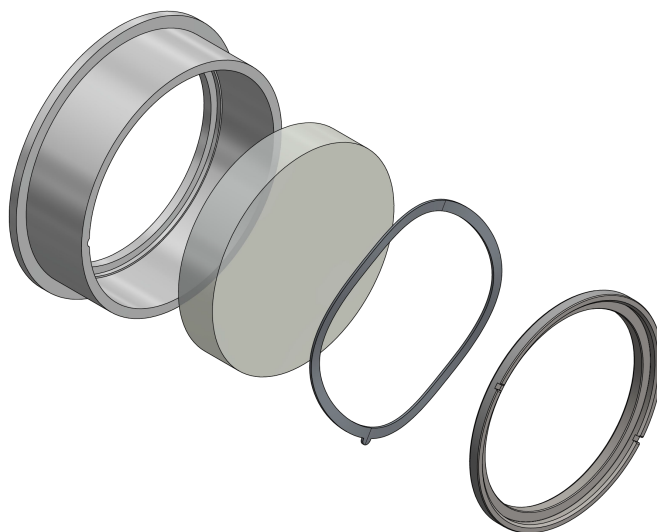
A schematic drawing of the components of the mirror holder assembly. It includes from left to right, the mirror holder, the cavity end mirror, a wave washer to avoid wavefront distortion in the mirror, and the retaining ring to hold the assembly in place.
